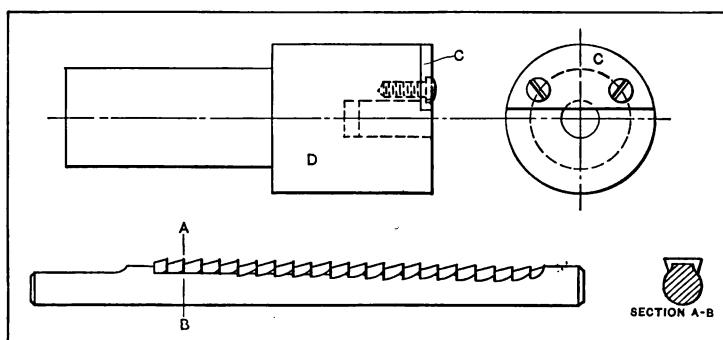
Broach and Holder used for broaching Bicycle Crank
